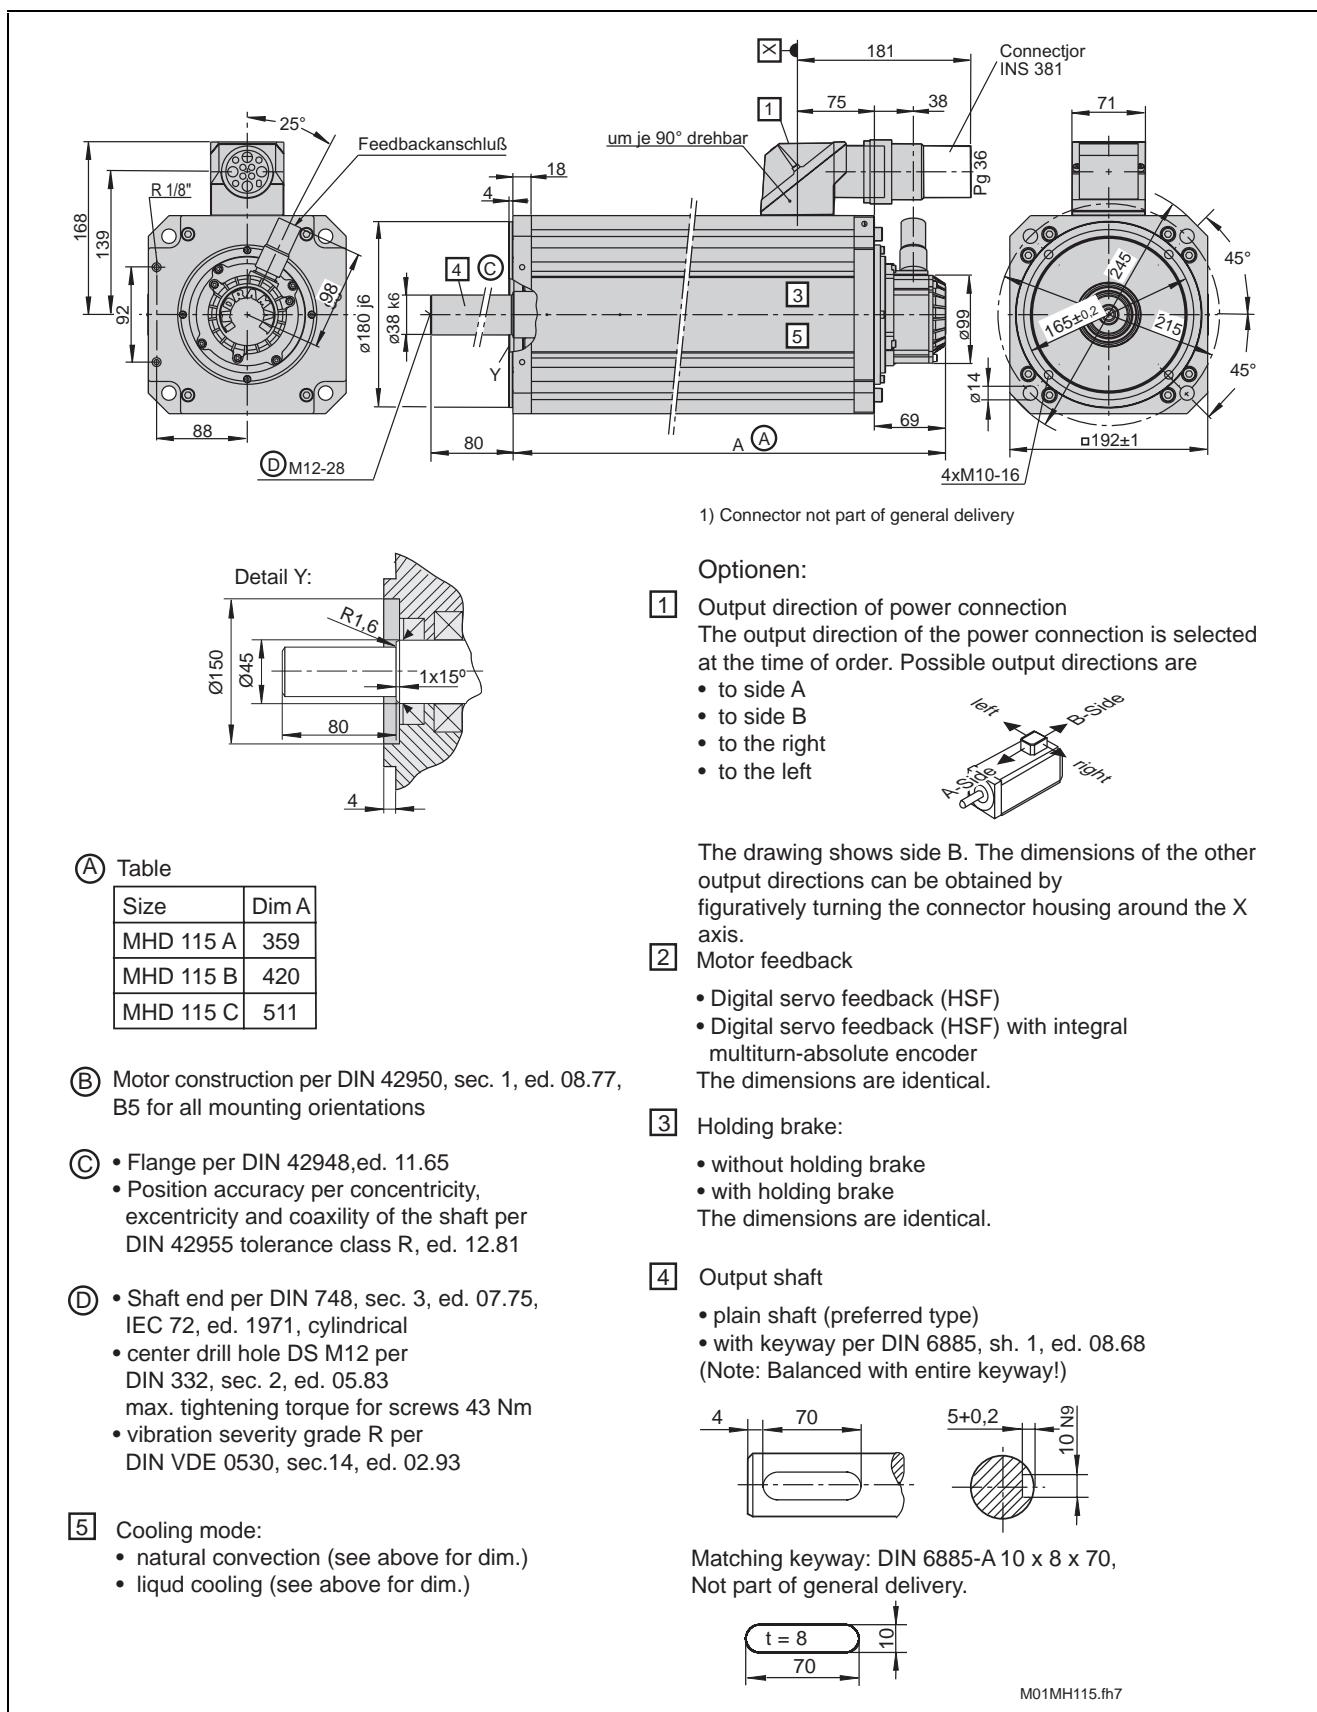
Dimensional sheet - MHD115.-....-N
